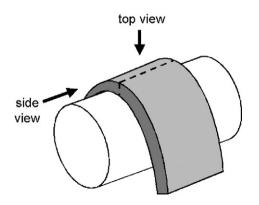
Schematic illustration of the sample sheet when taking a picture.
